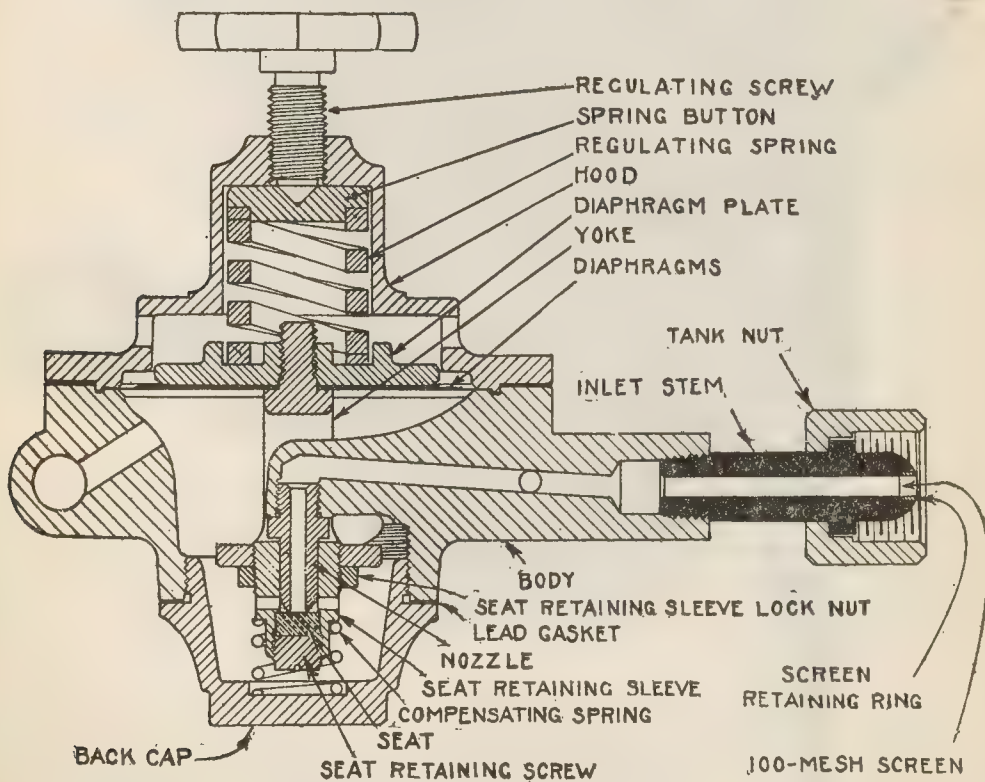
,054.—Torchweld gas pressure regulator; sectional view showing construction and names of parts.
